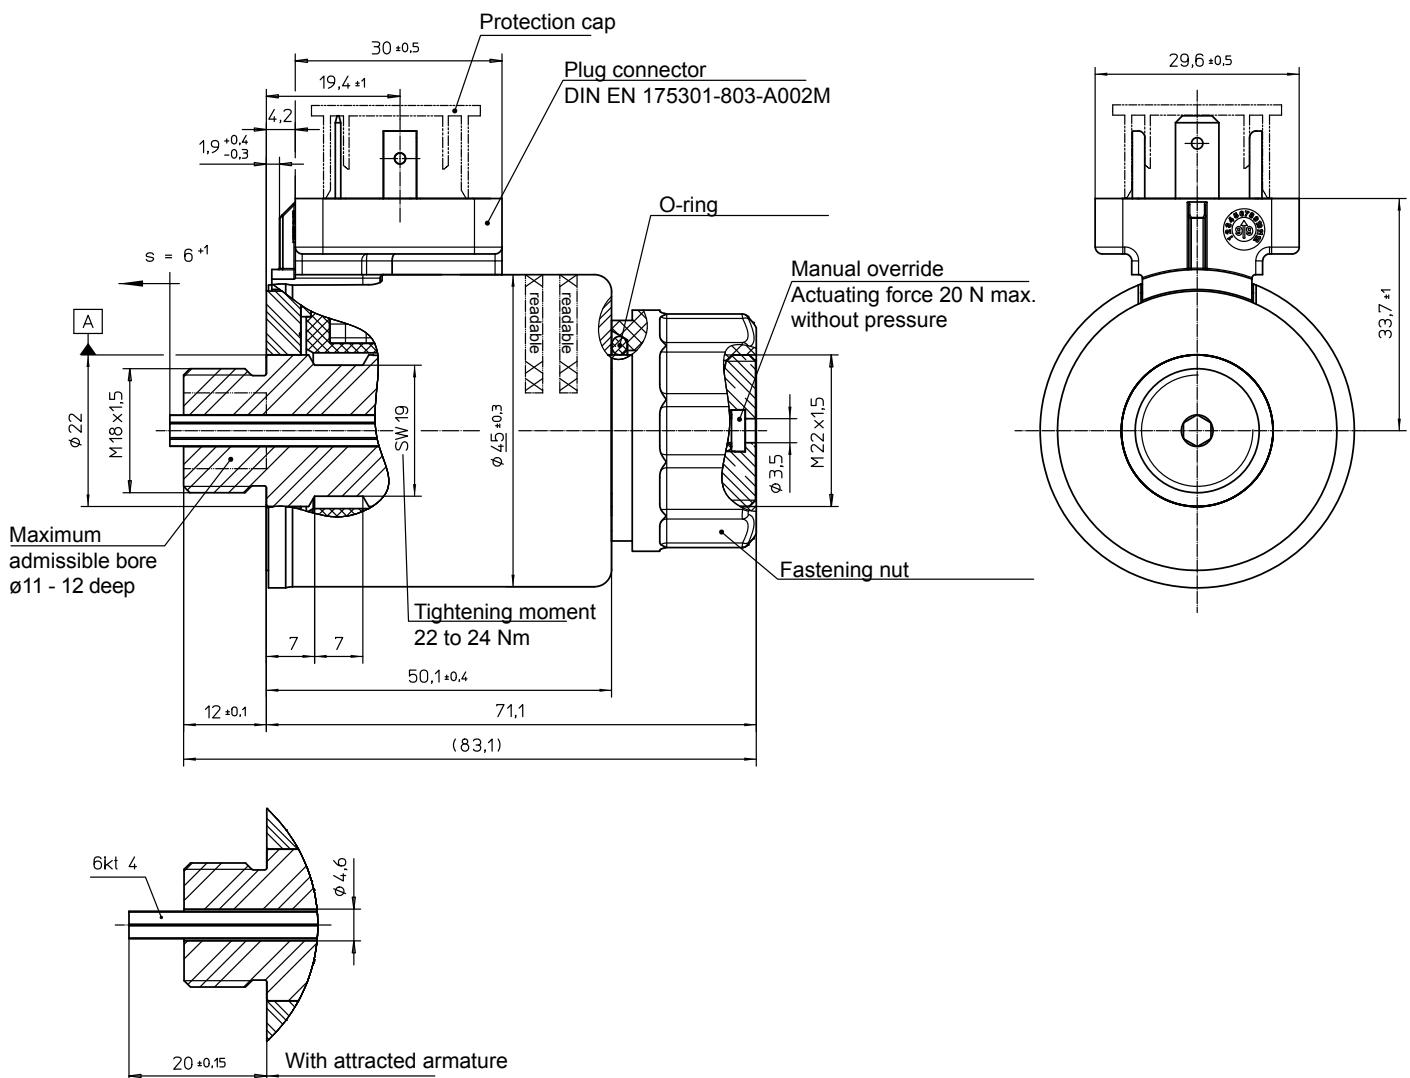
Dimensional drawing to Type G HP Y 045 N54 A01
